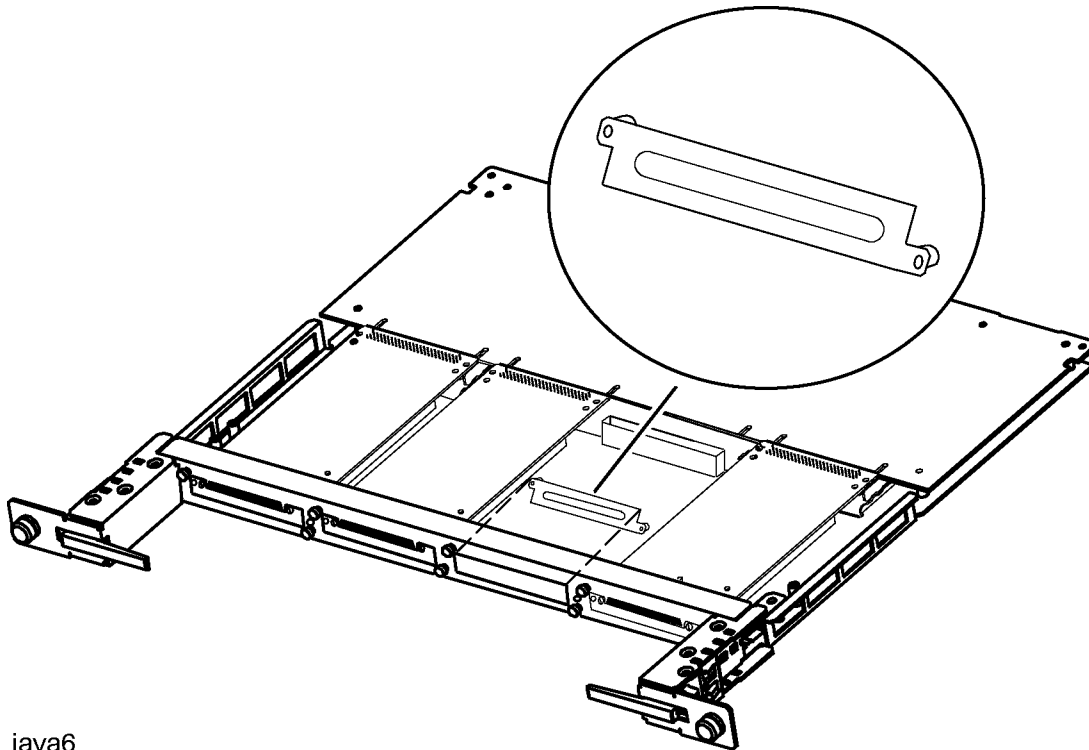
Attaching an HSC I/O card to an HP-HSC I/O Bus Converter
